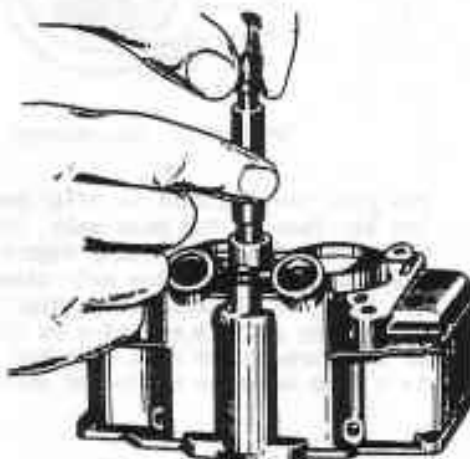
INSTALLING CHECK VALVE STRAINER (3).
